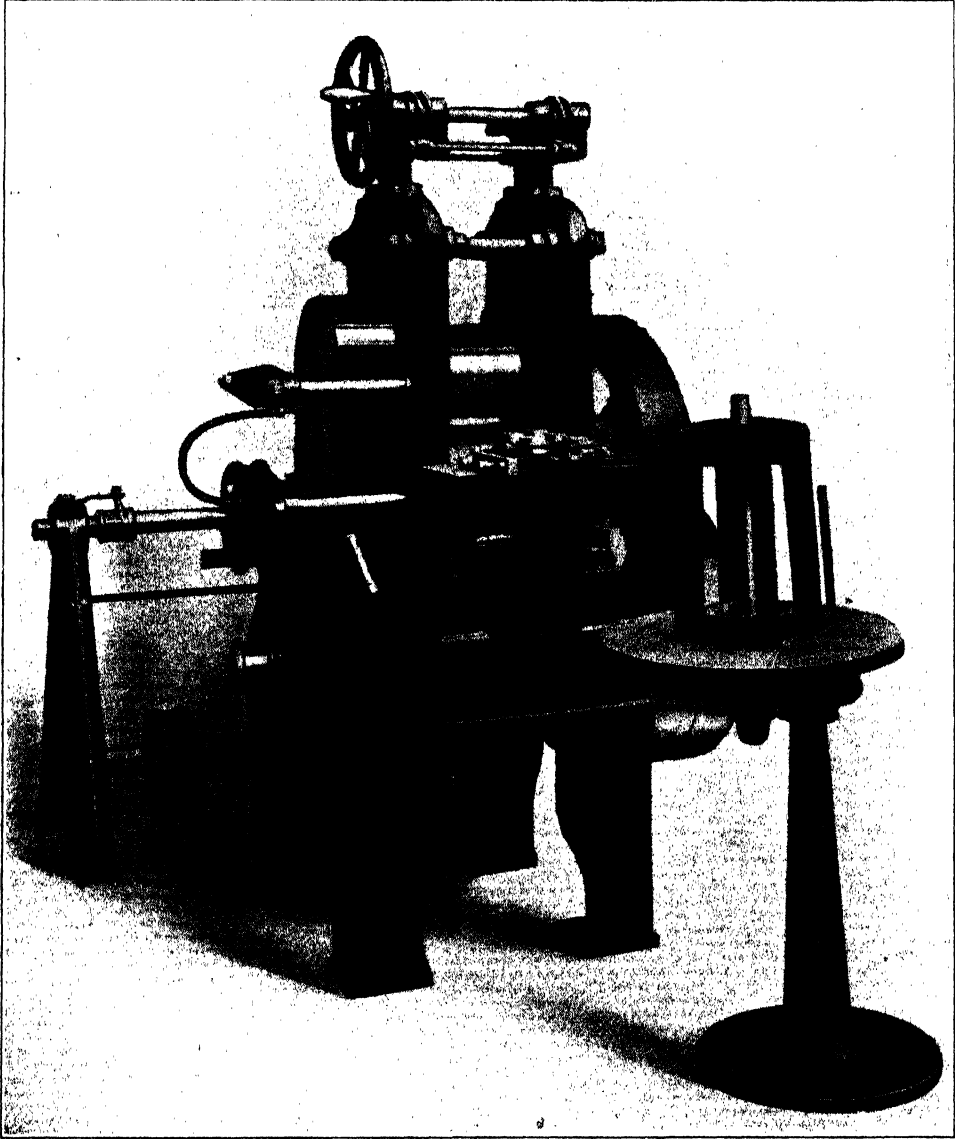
9 IN. \times 6 IN. WIRE FLATTENING MILL.
